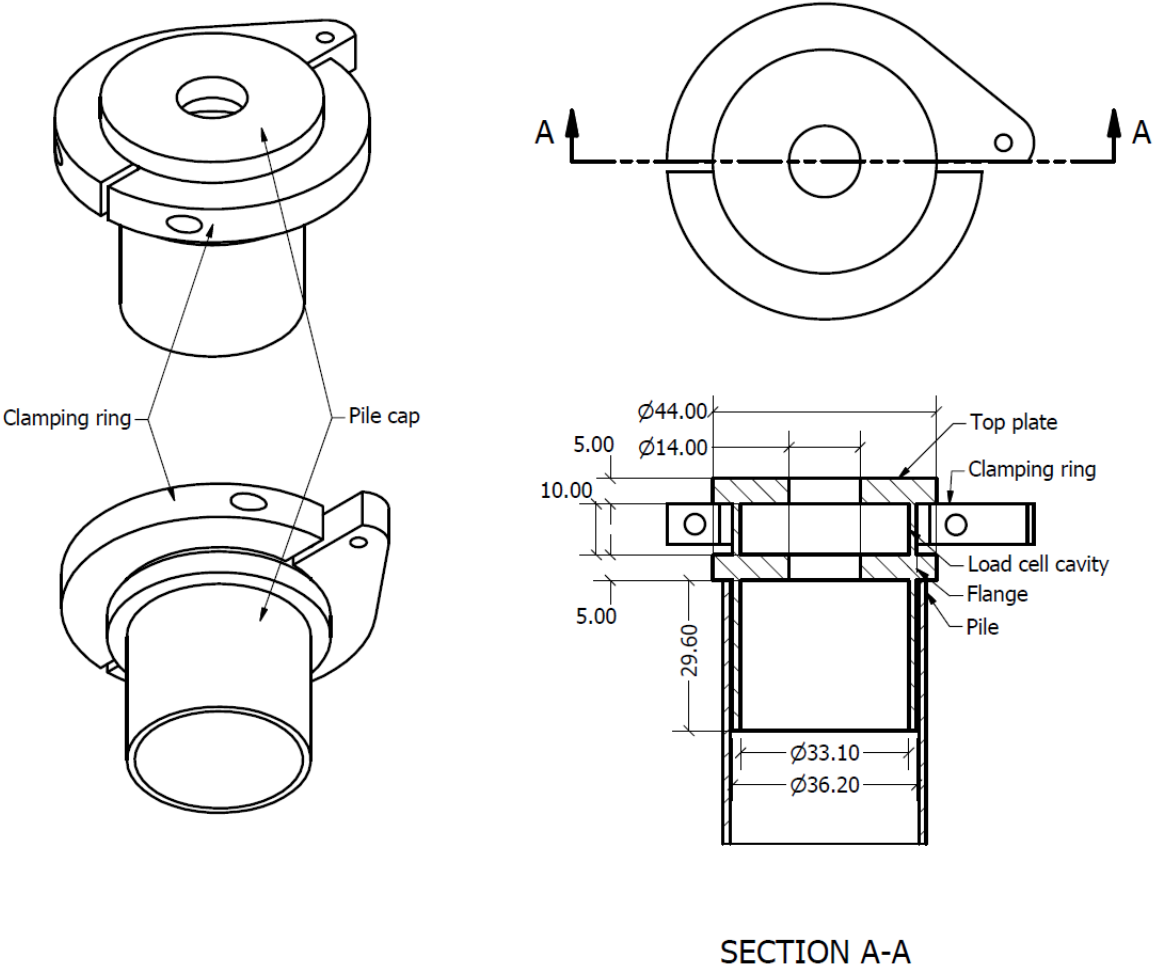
Detailed view pile cap and clamping ring. Dimensions in mm
